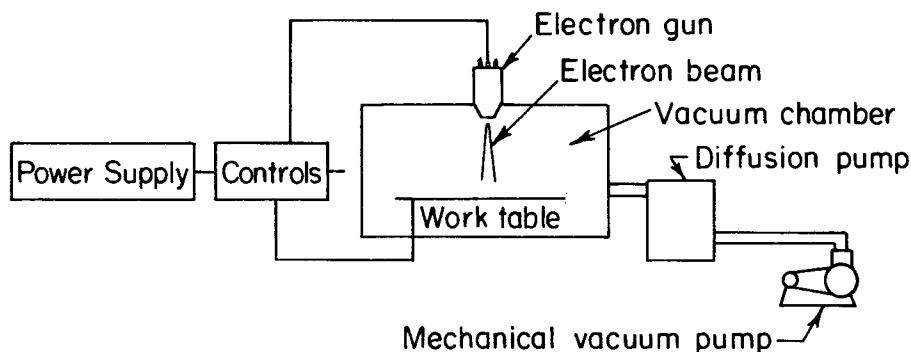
SCHEMATIC OF AN ELECTRON-BEAM-WELDING MACHINE
